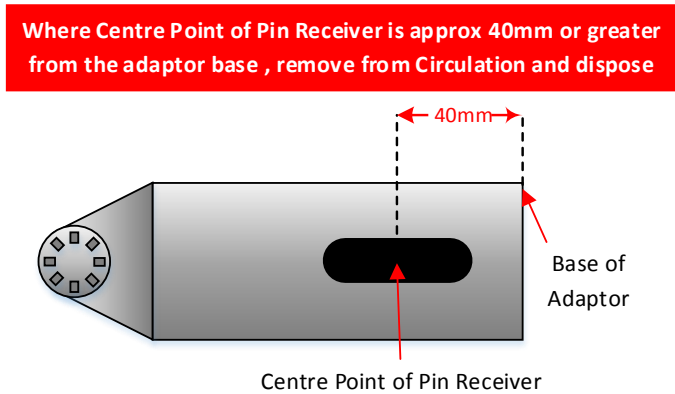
Universal Adaptor with Fault dimensions shown. NTS
